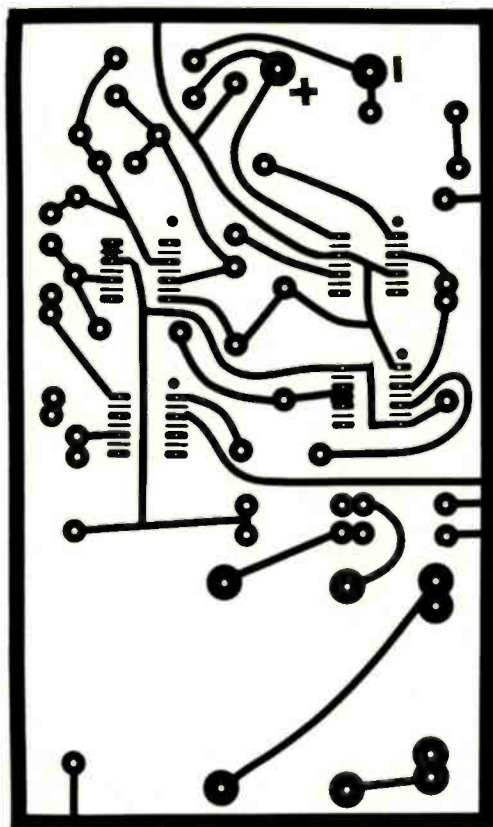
Actual-size printed-circuit board etching-and-drilling guide.
